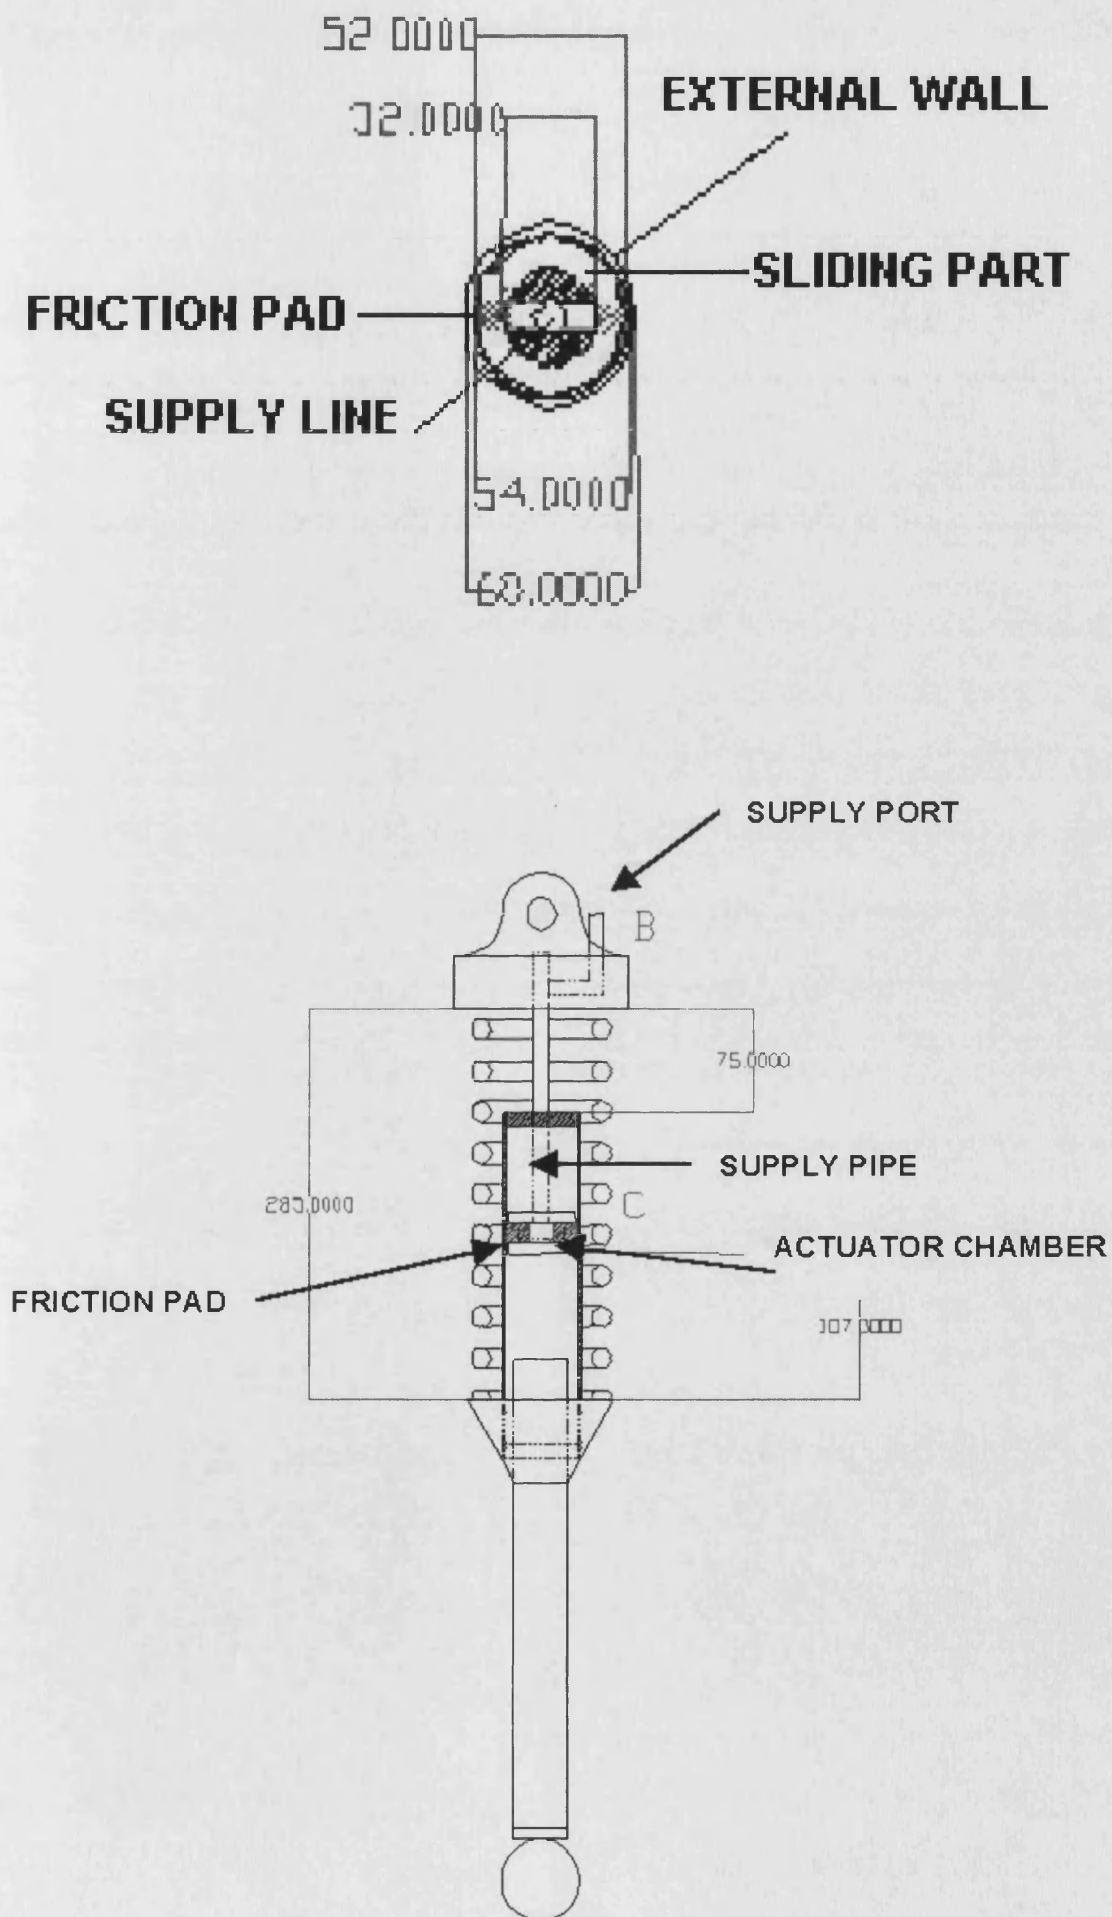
Drawing of the final design with enlarged circular cross-section.
